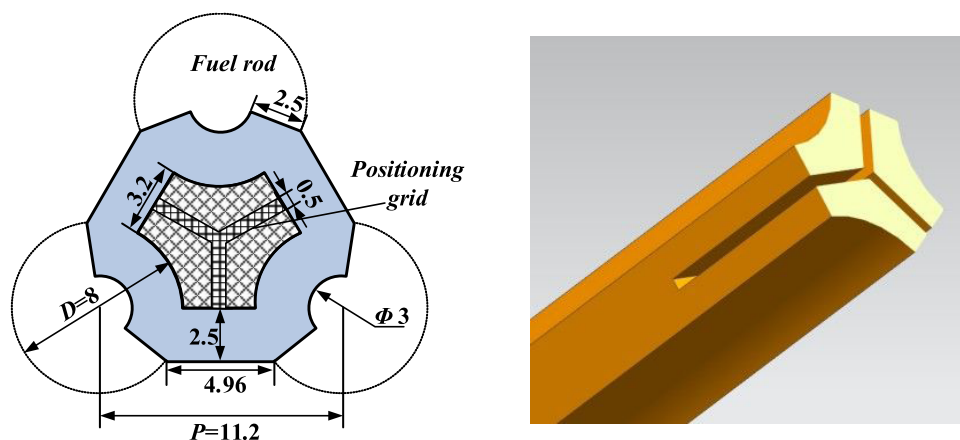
Schematic of test section structure. (The length of the test tube section of the triangular core channel is 1000 mm, and the structural section at the standard grid spacer is shown).
